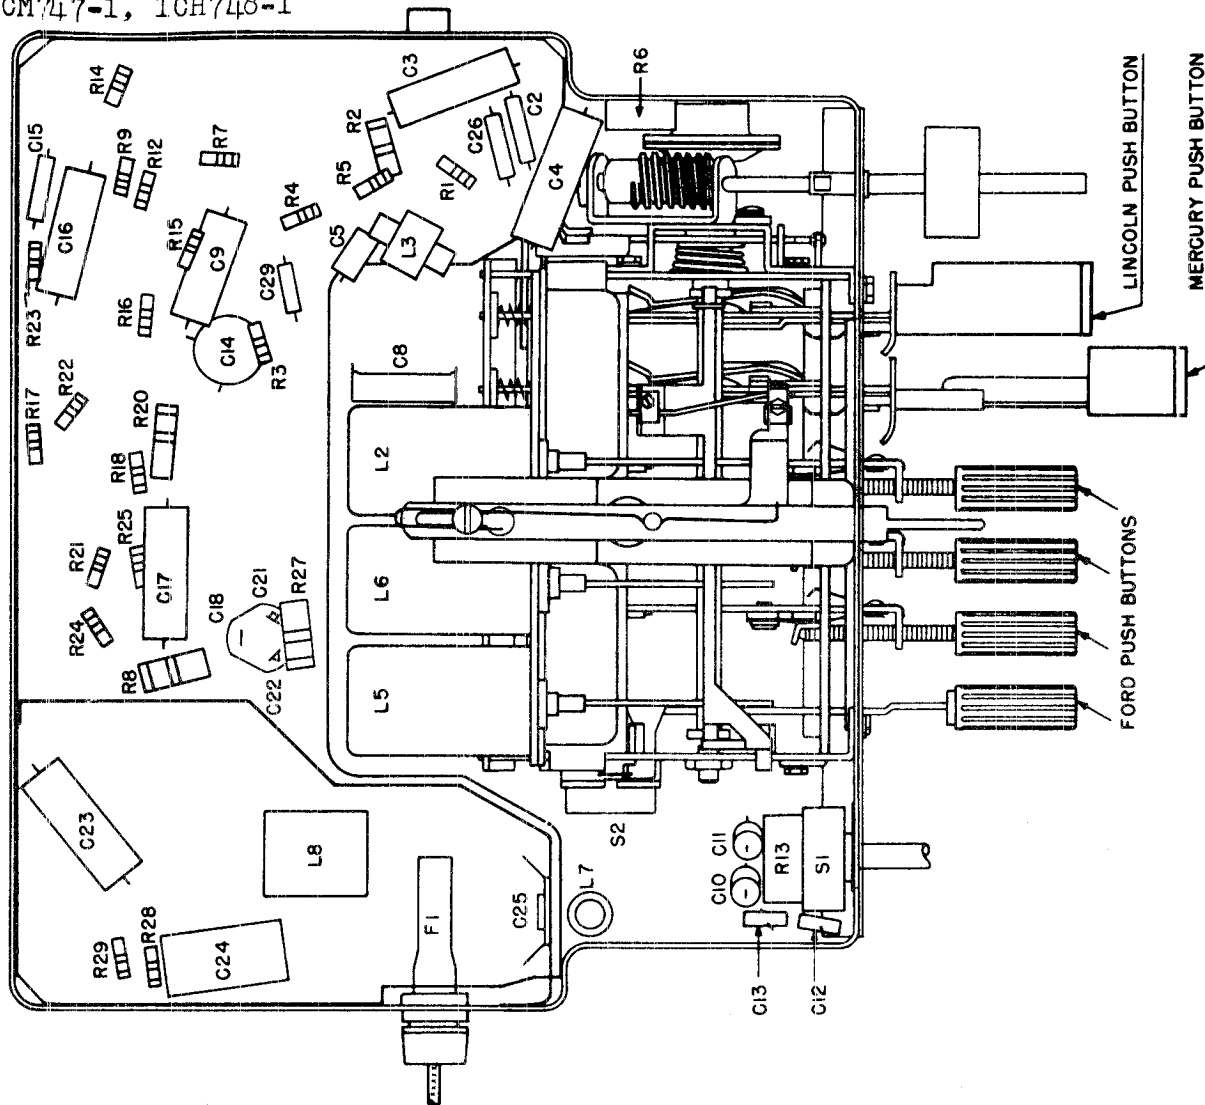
PARTS LAYOUT - TOP OF CHASSIS
